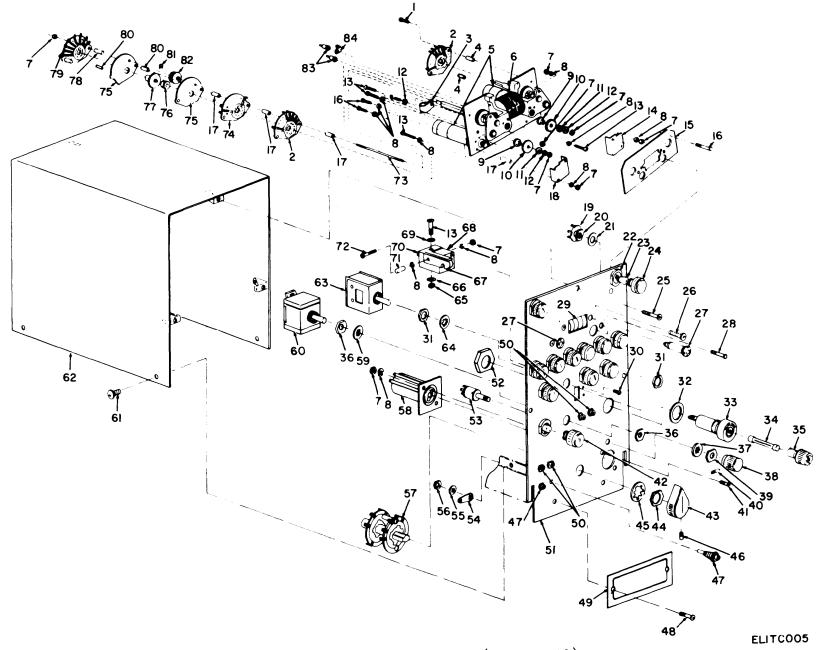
Front Panel Assembly (SMB-504958) (Sheet 2 of 2).
